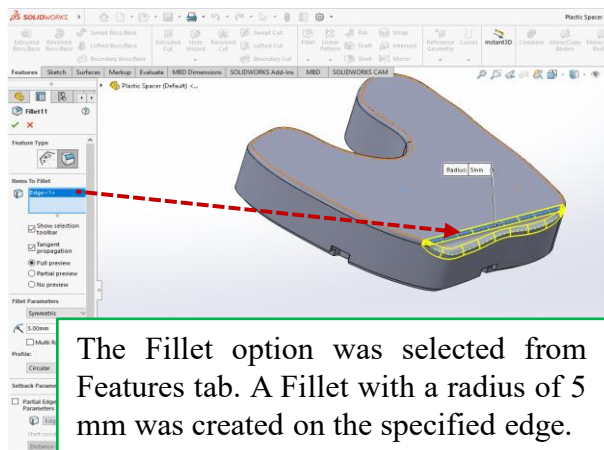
Applying a 5 mm radius to the sharp edges formed after the third Extruded Cut operation on the Plastic Spacer component using the Fillet command
